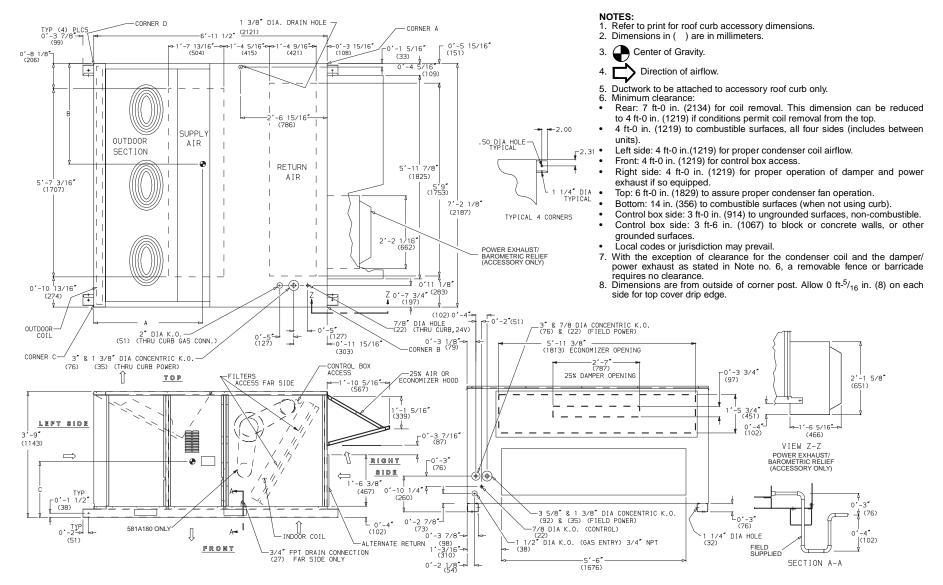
Base Unit Dimensions; 581A155 and 180
